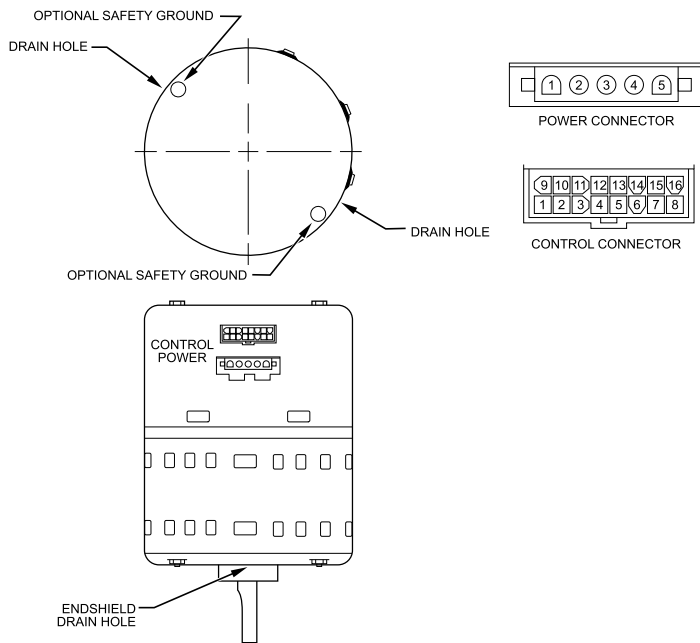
FV4 Motor / ECM2.3 Motor (pre-2023)
